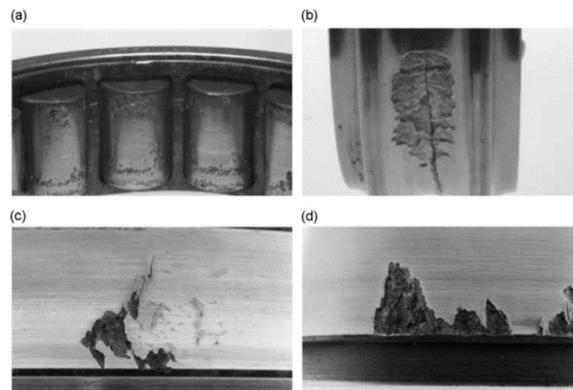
Fatigue spalls on various elements of rolling element bearings [9]
